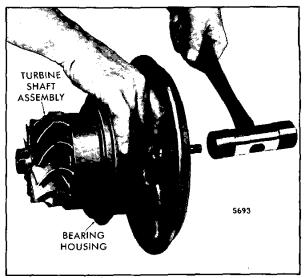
Tapping Turbine Shaft Assembly from Bearing Housing
